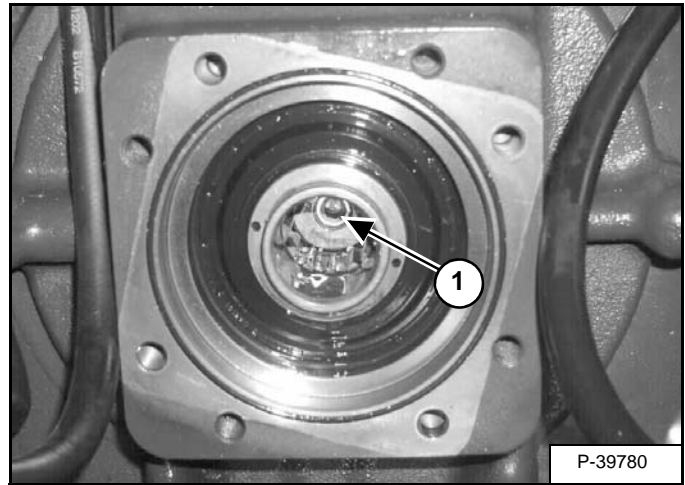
shows the motor carrier seal correctly installed.
